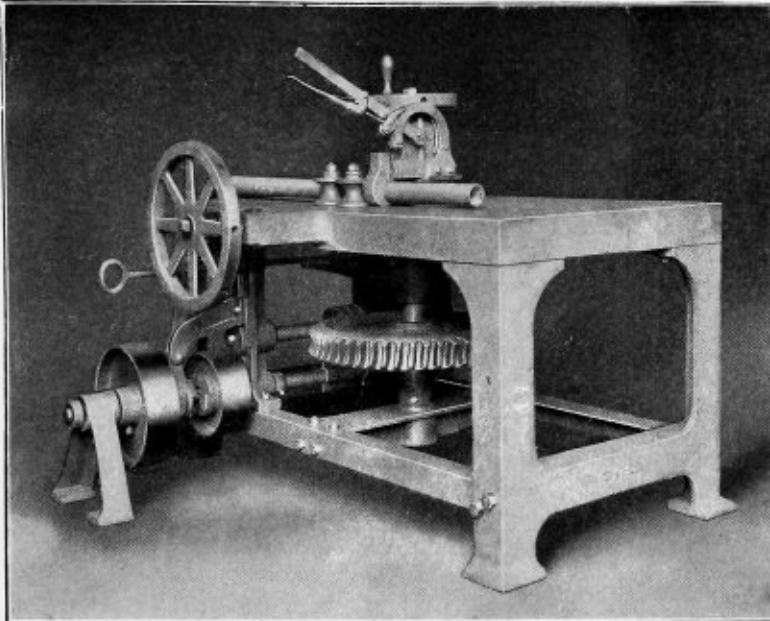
PIPE GRIPPED READY FOR BENDING.
